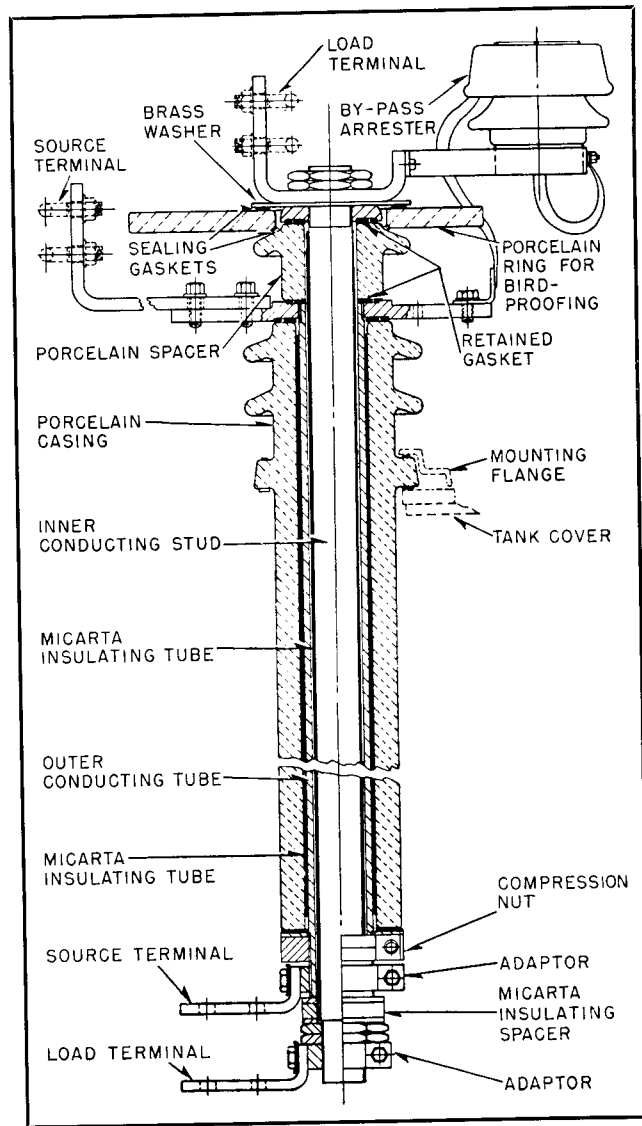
Concentric Lead Bushing with Bird-proofing for Type URS Step Regulator
